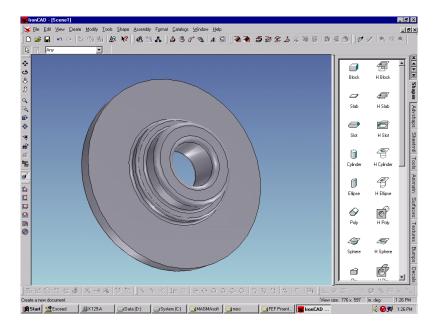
IronCAD solid model of a flange produced by Metal Technologies Inc.
